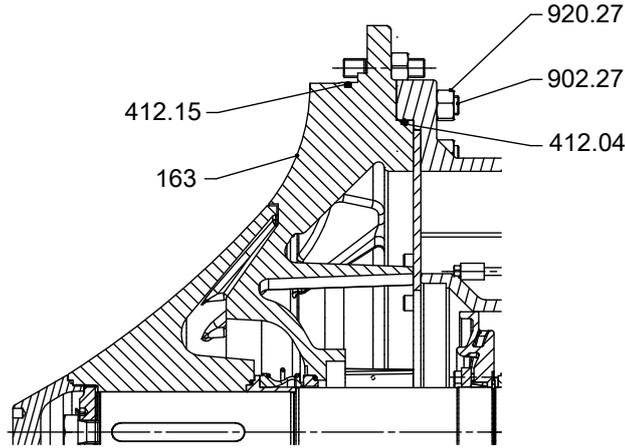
Special feature of hydraulic system - pump set with cooling system
